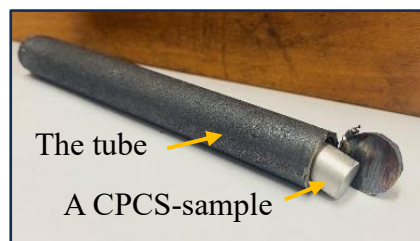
Extracting the sintered 17-4PH samples from a stainless-steel tube
